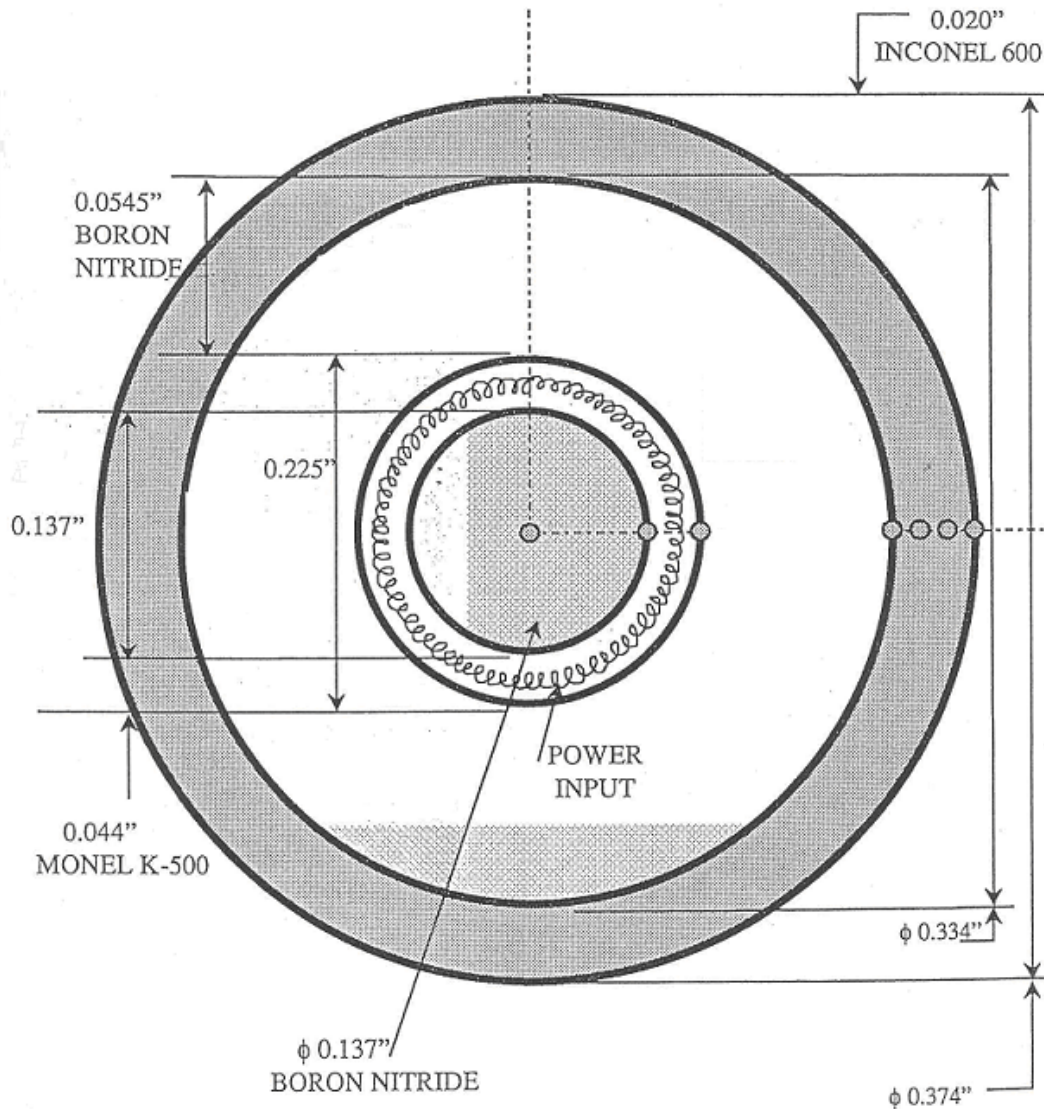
Geometry, Materials and Dimensions of RBHT Heater Rod.
